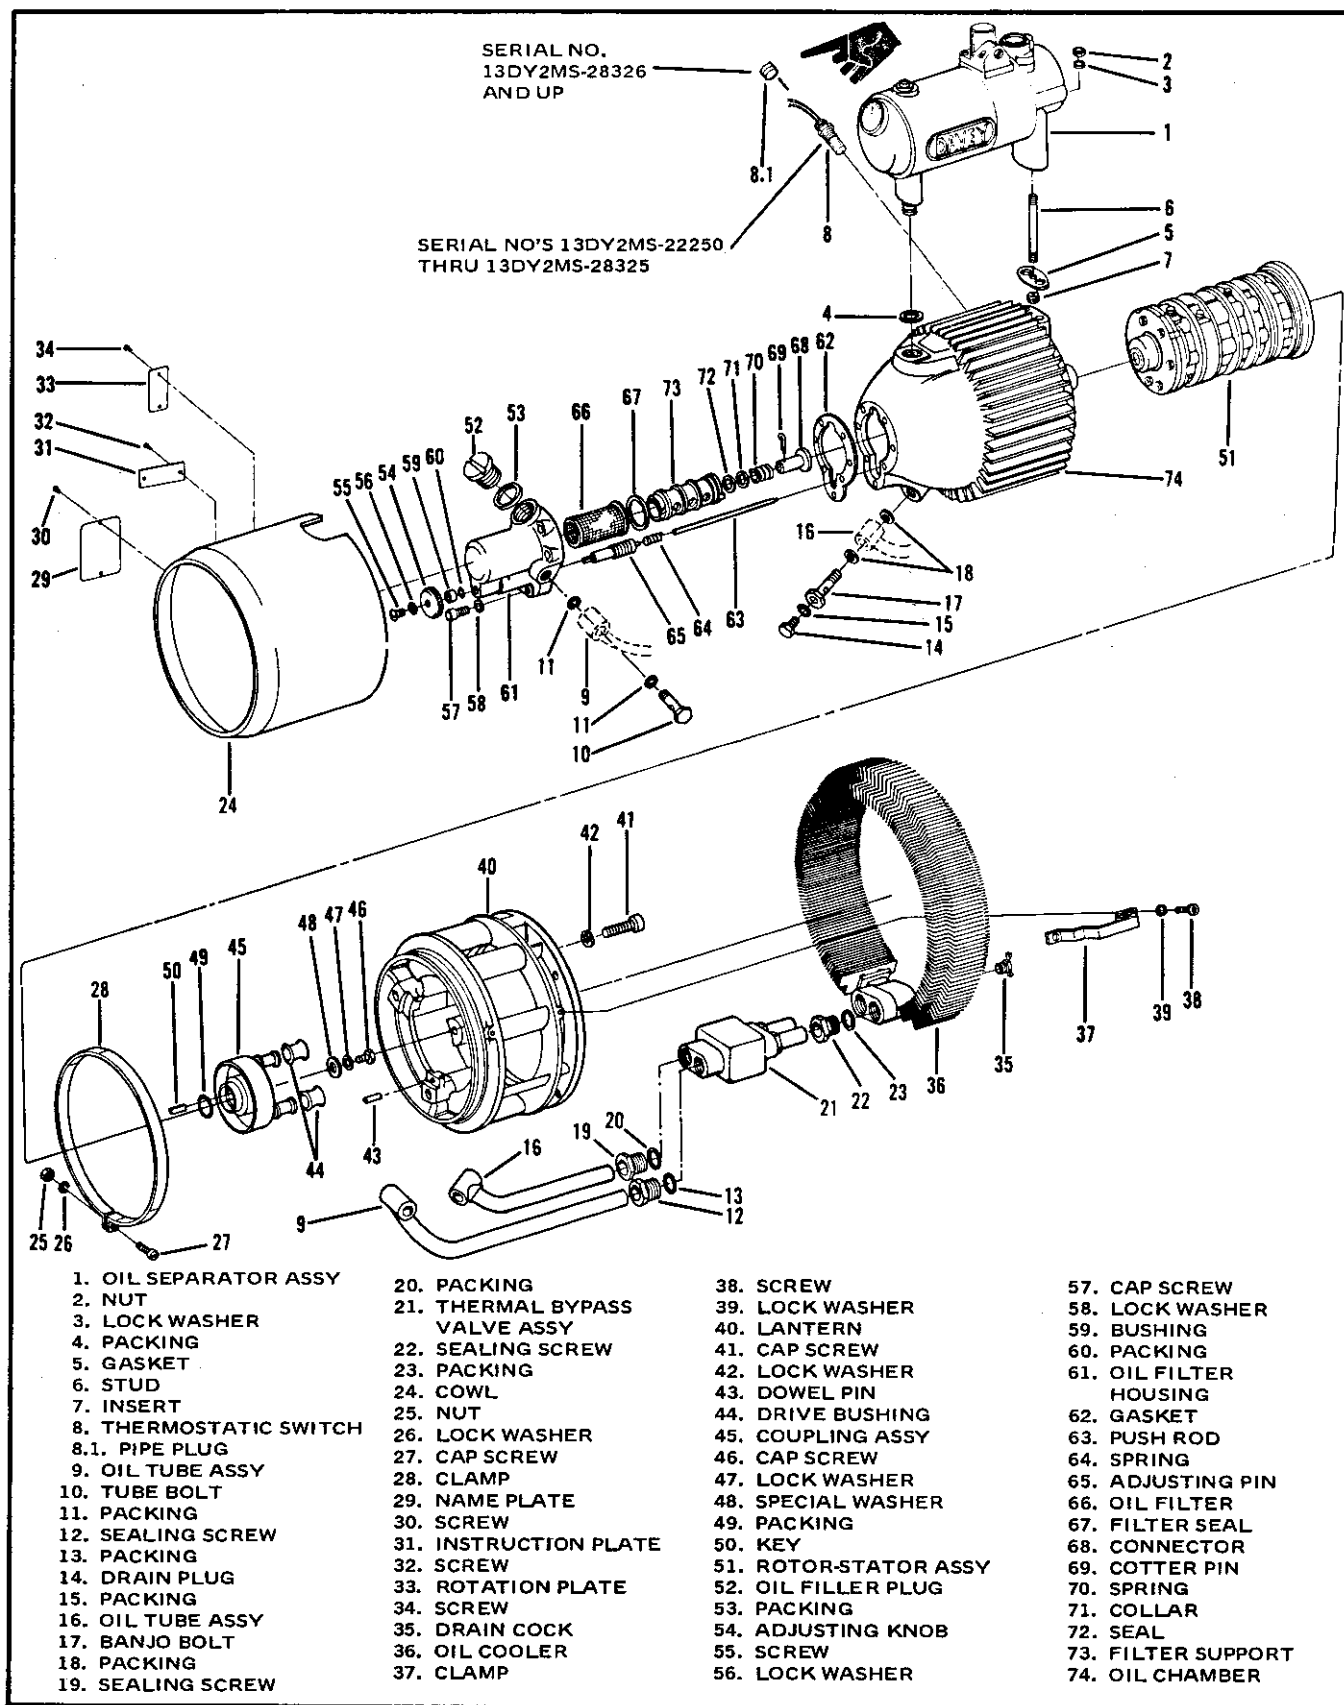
Rotary Compressor Assembly - Disassembly and Assembly
